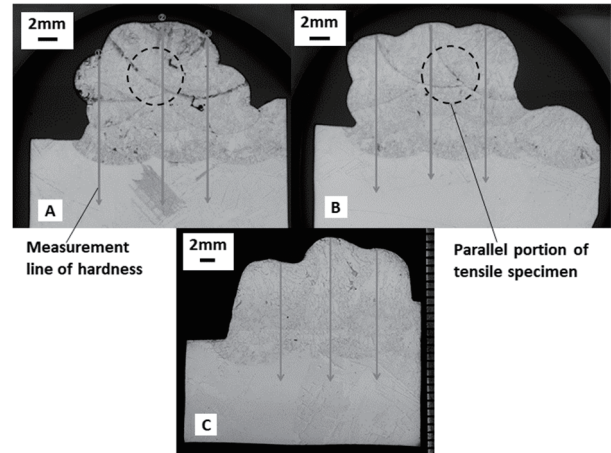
Cross sections of multi-pass welding samples.
